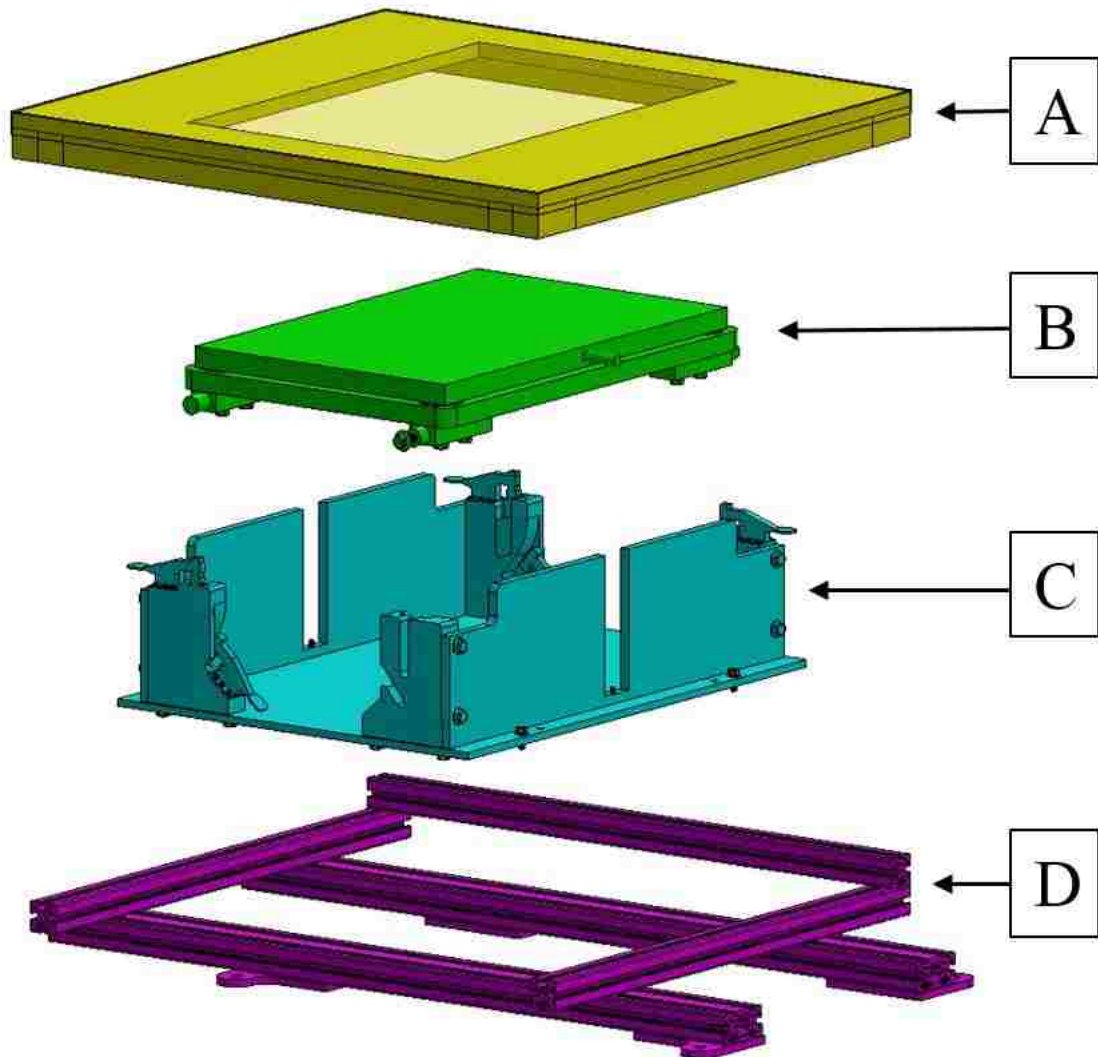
Exploded view of disturbance device, consisting of: (A) floor panel, (B) force plate assembly, (C) rotational base, and (D) floor mount.
